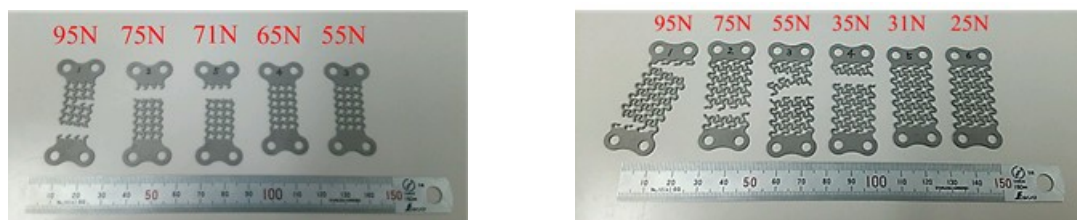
Improved meshed Gum Metal plate specimens after tensile fatigue tests (left: 90°-④, right: 90°-⑤)
